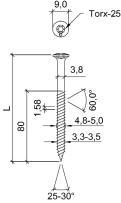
PS 4.8 Screw forfixing in metal sheets
